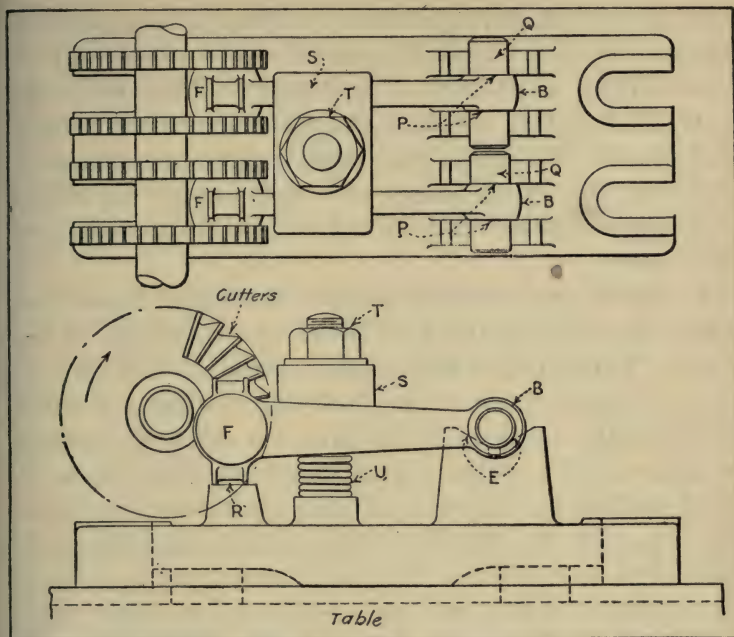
DOUBLE-STRADDLE MILLING FIXTURE FOR AN AUTOMOBILE CONNECTING ROD
